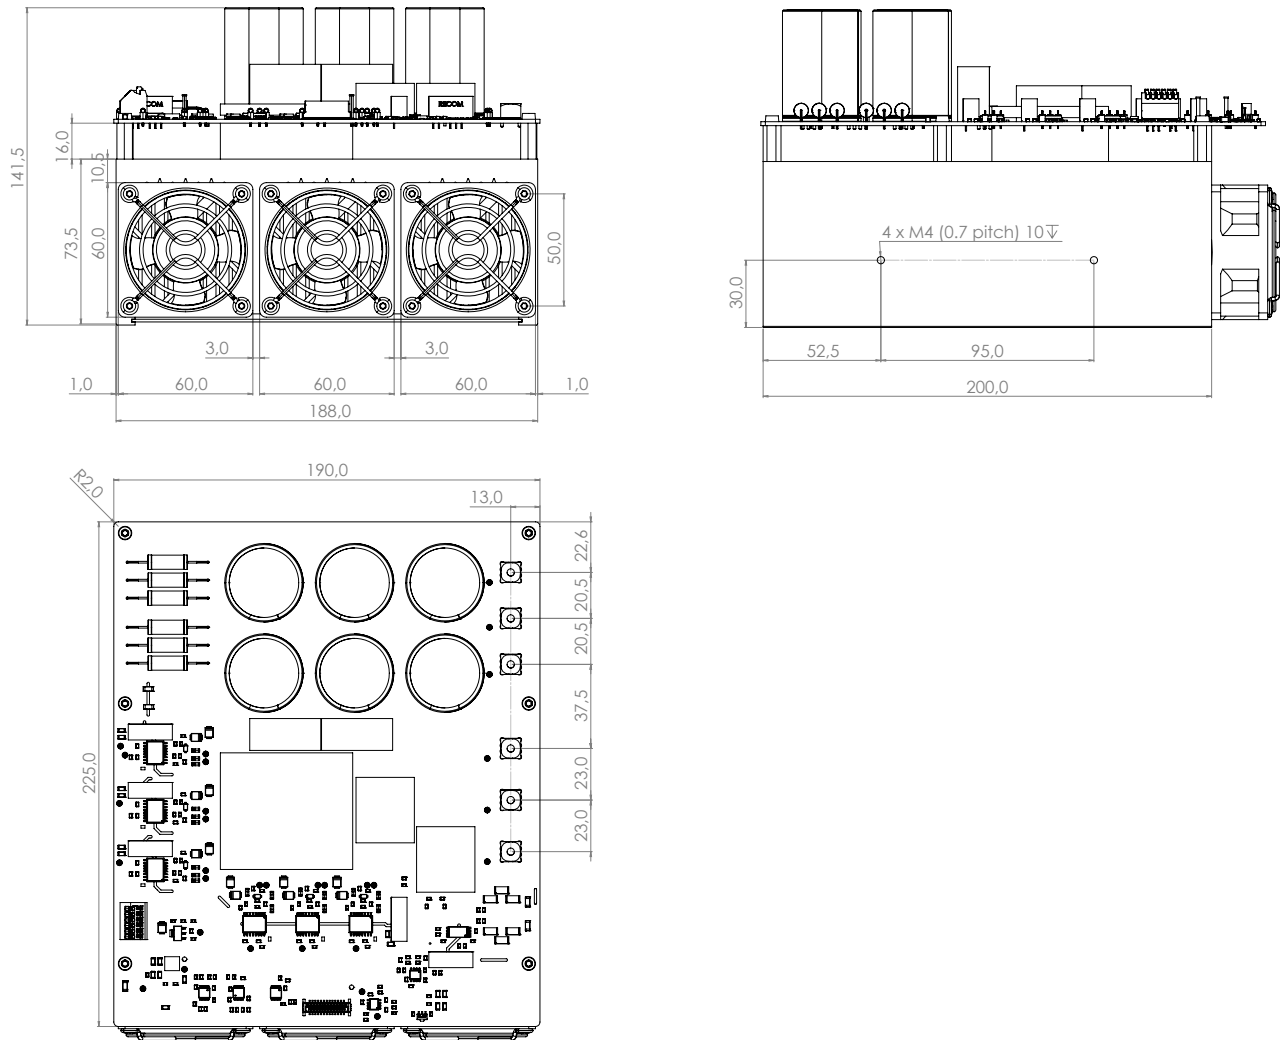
PCO02-10T800 Front, top, and side view mechanical drawings.
